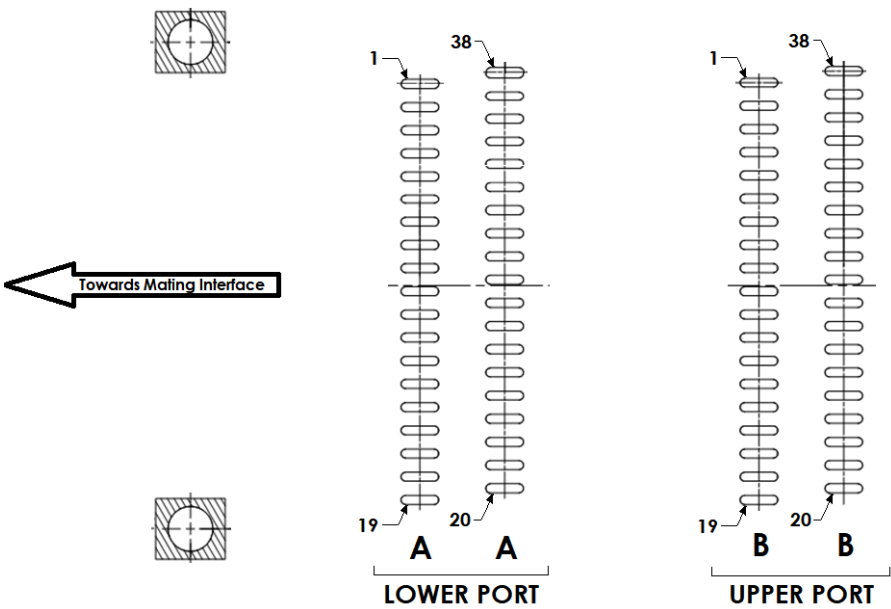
QSFP112 1x1 Connector Style A & Style B Footprint Pad Numbering
